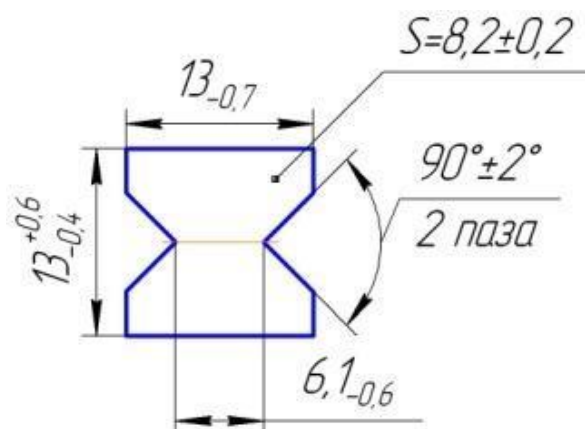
Dimensions of 9H314M projectile 1-10
